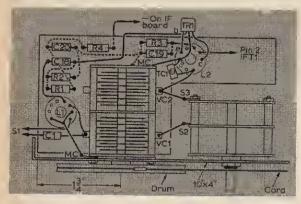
Layout of the mixer assembly built on an aluminium plate.
